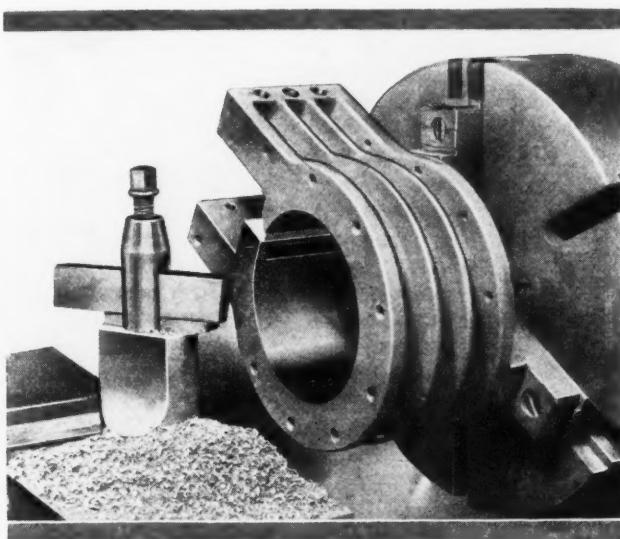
Semi-steel Casting which Previously Required Two Cuts Now Being Finished with Ramet Tool in One Cut
